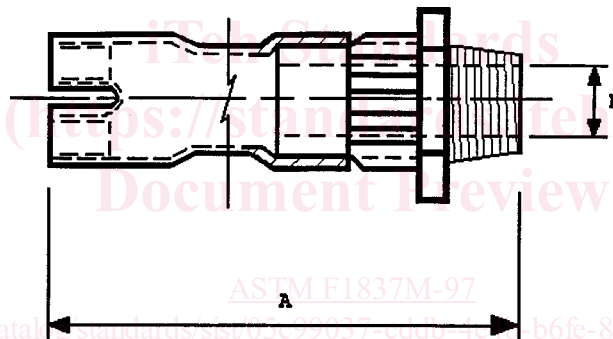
Type II-Multi-Legged Threaded Cable Entry Seals
